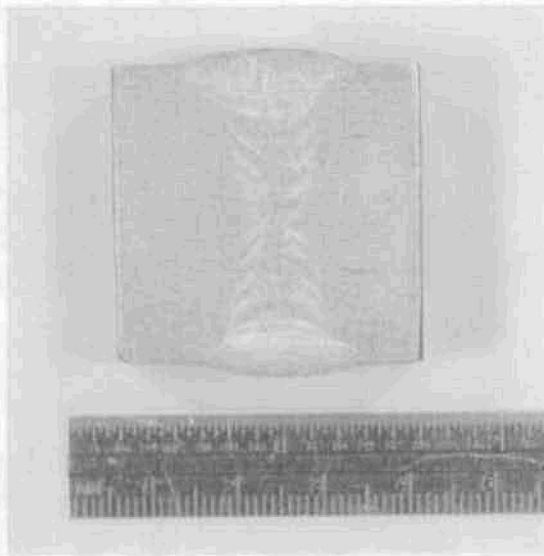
Macrograph of a GTAW welded Alloy 22 plate
